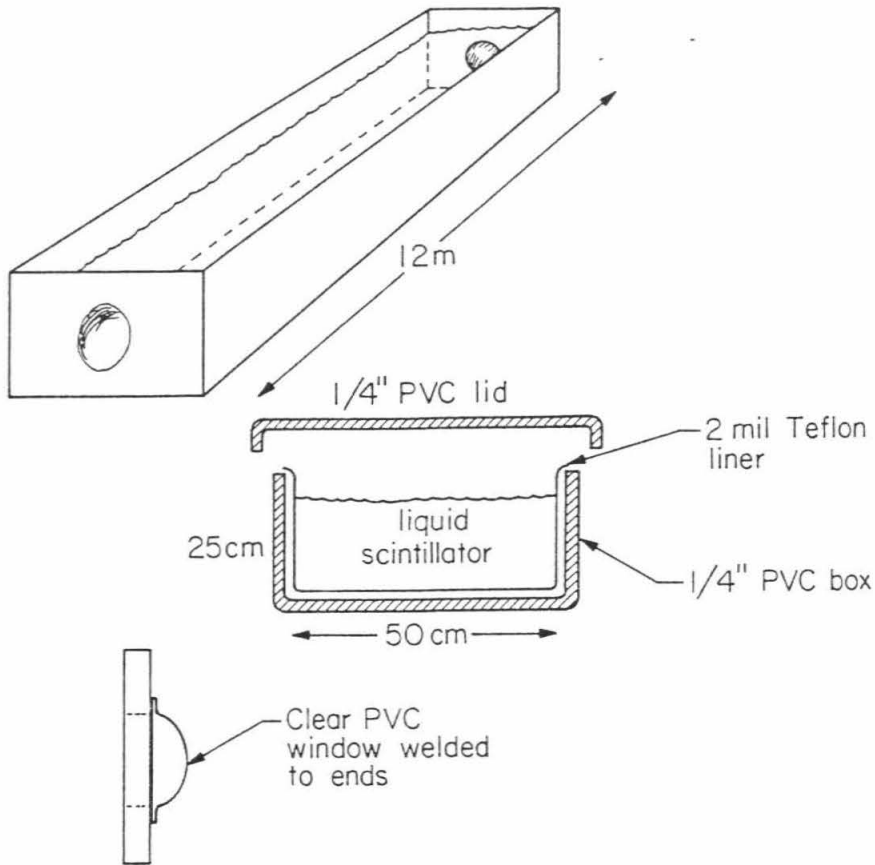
The first prototype of the MACRO scintillator counter built at Caltech.
